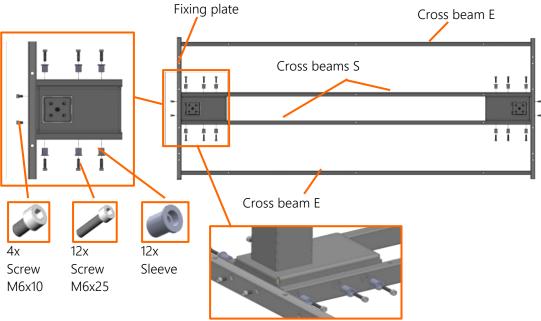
Assembly of lifting elements of the 2-leg system with top frame
